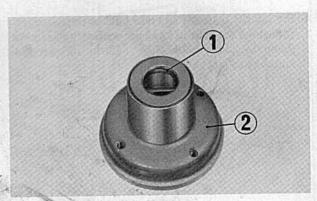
(1) O-ring (2) Oil filter rotor
